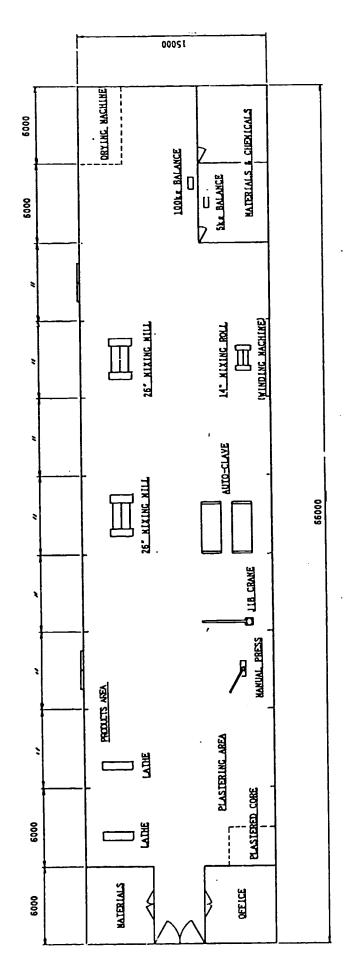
LAYOUT OF EXISTING EQUIPMENT FOR RUBBER ROLL SHOP
